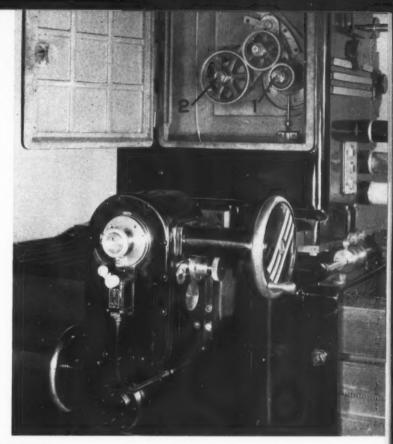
Cutter-spindle carriage and change gear drive. Drive unit is bench assembled. Gear 2 is driven by gear 1 and drives spindle slide through gears, screw and nut
